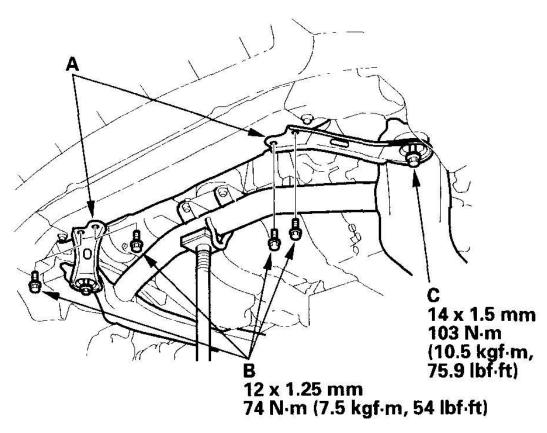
Installing Front Suspension Subframe Rear Brackets Courtesy of AMERICAN HONDA MOTOR CO., INC.
